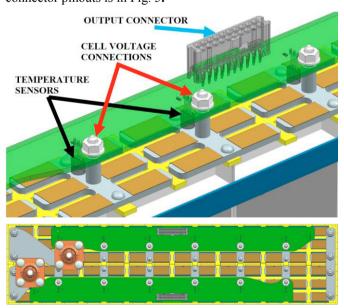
Auxiliary PCBs integration and details from inside of the battery segment.
